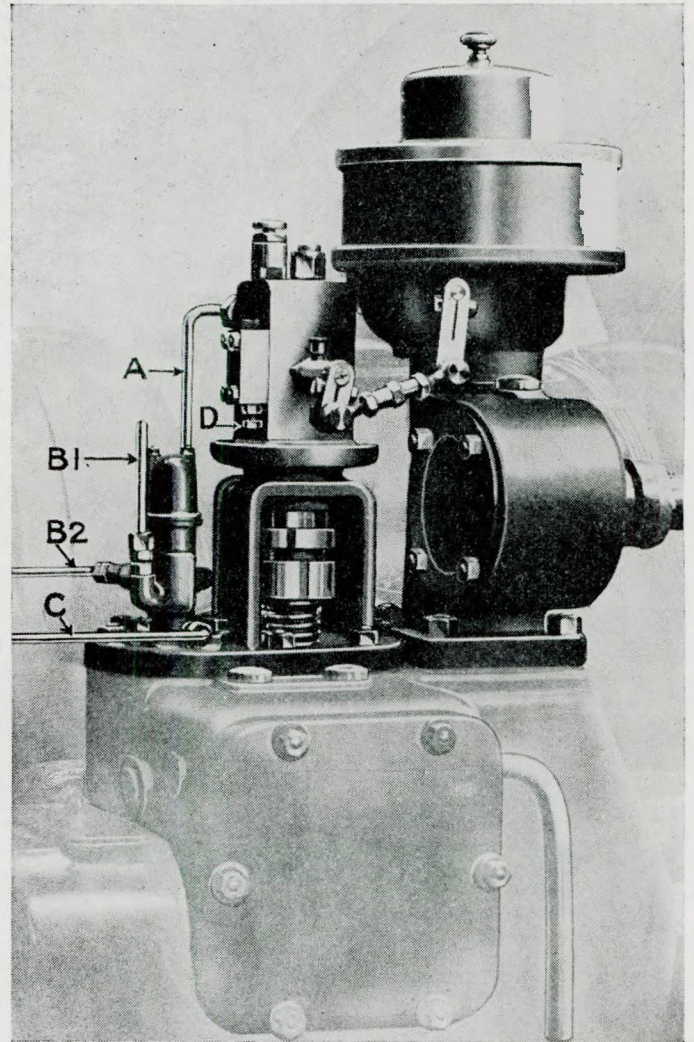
Ruston high compression engine fuel pump and distributor, with governor on right hand side.
